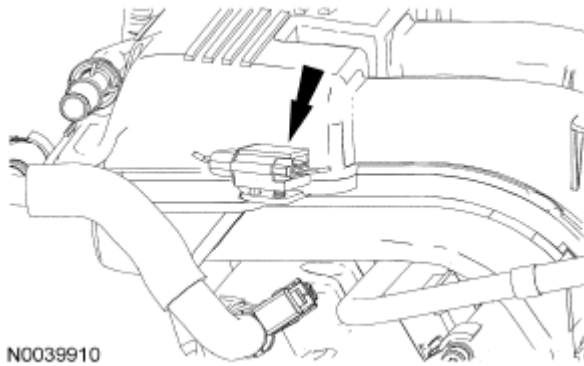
Locating Knock Sensor (KS) Electrical Connector
